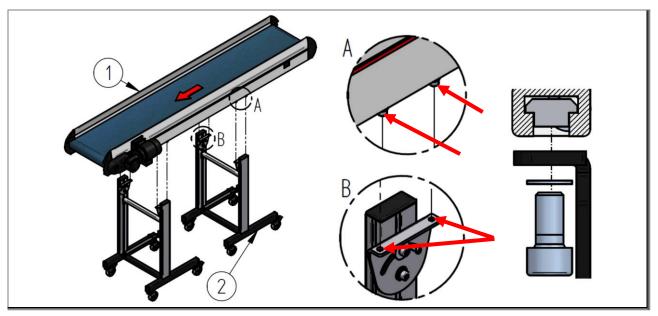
Assembly, conveyor with support HE 030 – HM 260 (typical)
